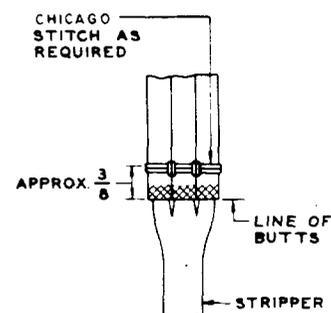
Fastening and Aligning Switchboard Cable Butts
